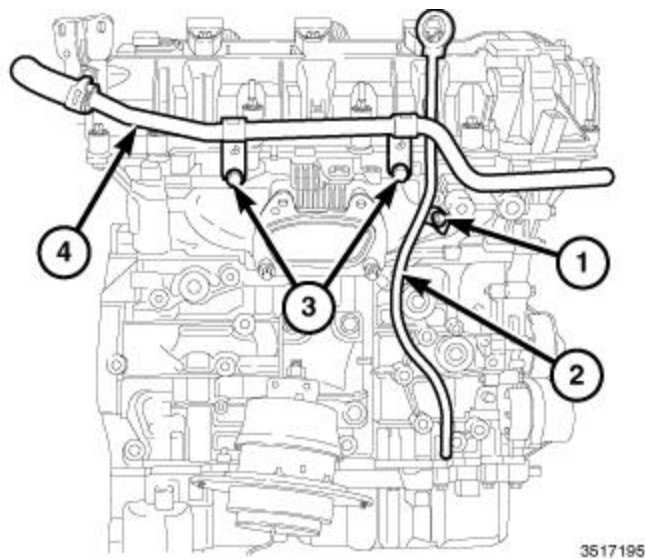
Heater Core Inlet Tube, Oil Level Indicator & Bolts
